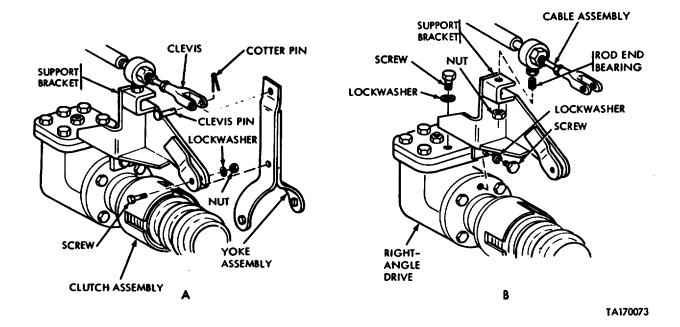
Removal or installation of hydraulic mechanical clutch support bracket and yoke assembly.
